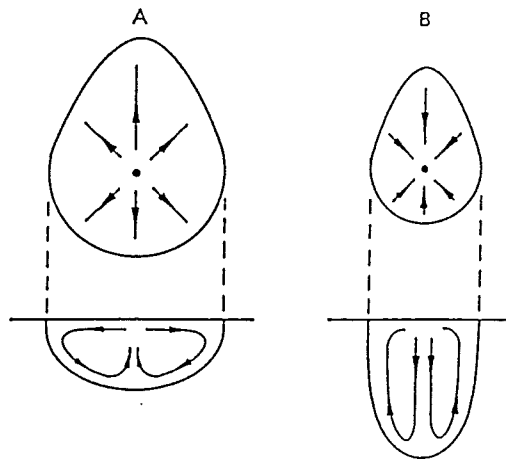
The two main flow types inside a weld pool (top and cross-section view) [3].
